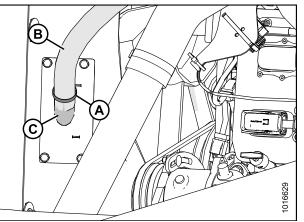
Aspirator Duct and Charge Air Cooler (CAC) Connectors
